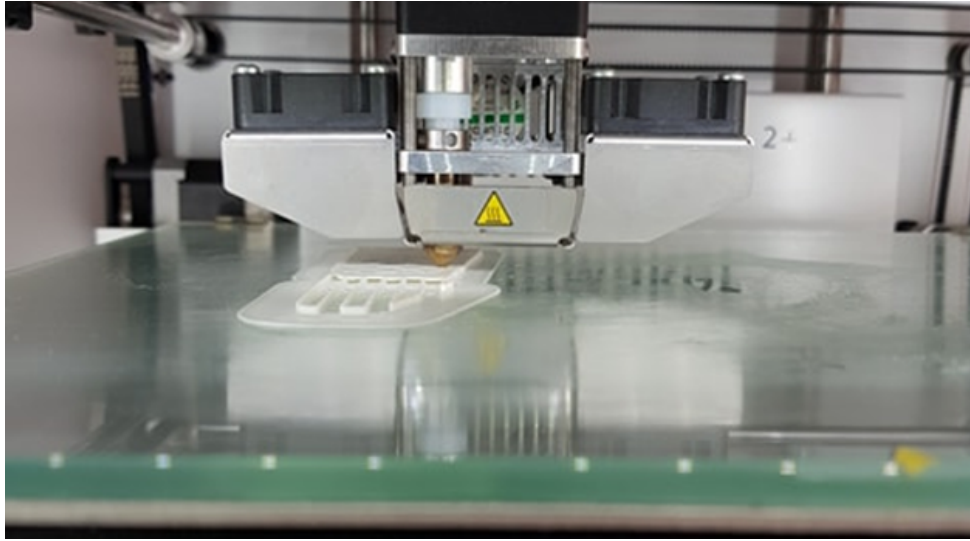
Ultimaker 2+ 3D Printer during printing of the initial handpiece design
